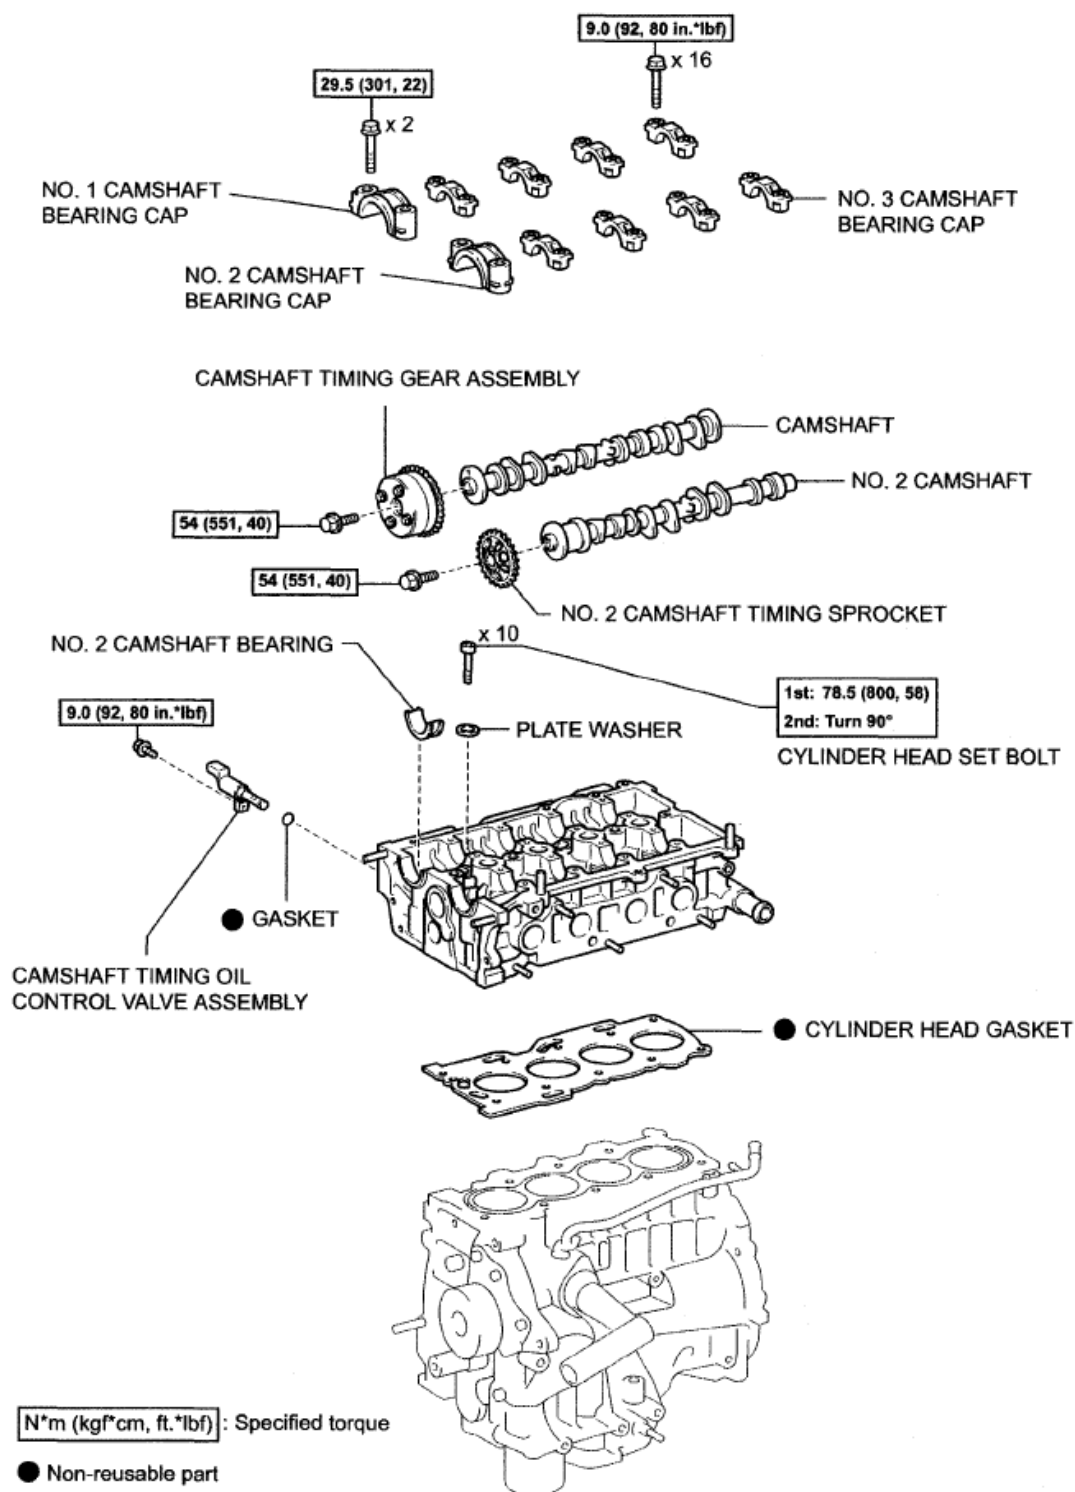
Identifying Cylinder Head Components With Specification (12 Of 13)
